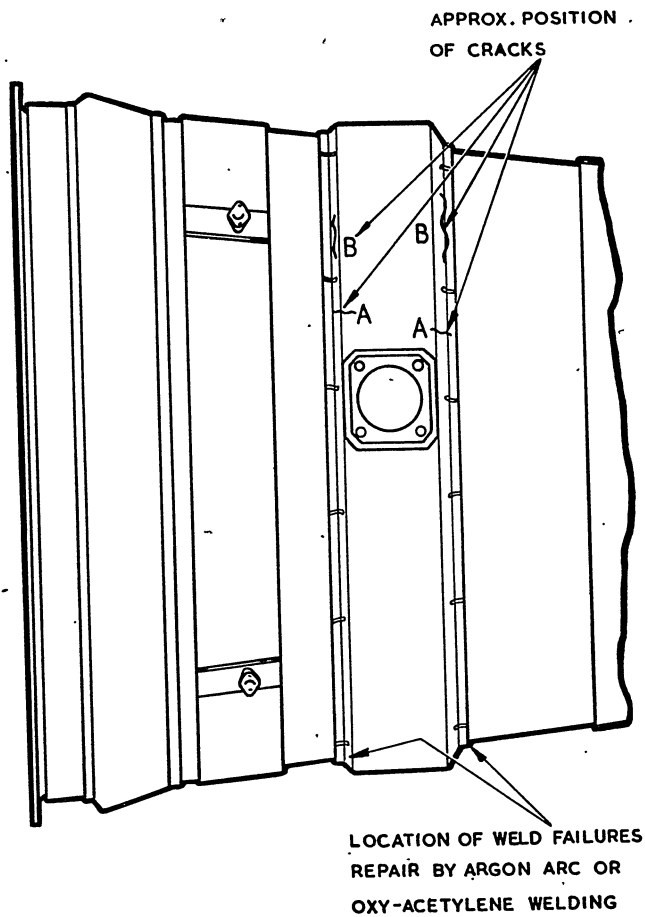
Probable position of cracks and weld failures occurring in tail pipe heater muff
